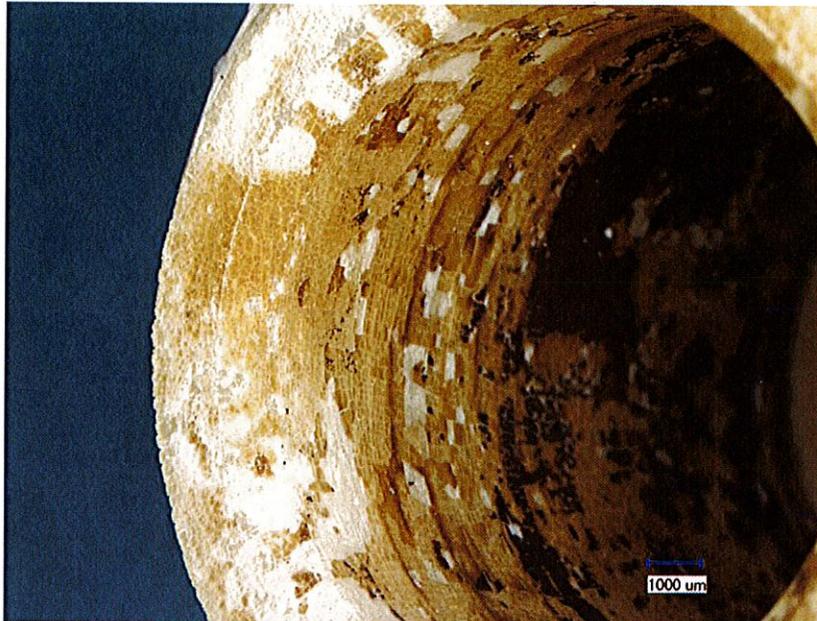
Magnified View of Mud Cracking on Threaded End of Fitting.
